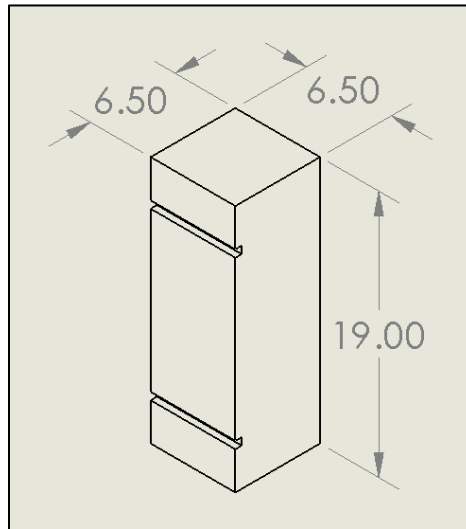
Creep test specimen design with dimensions shown in millimeters.
